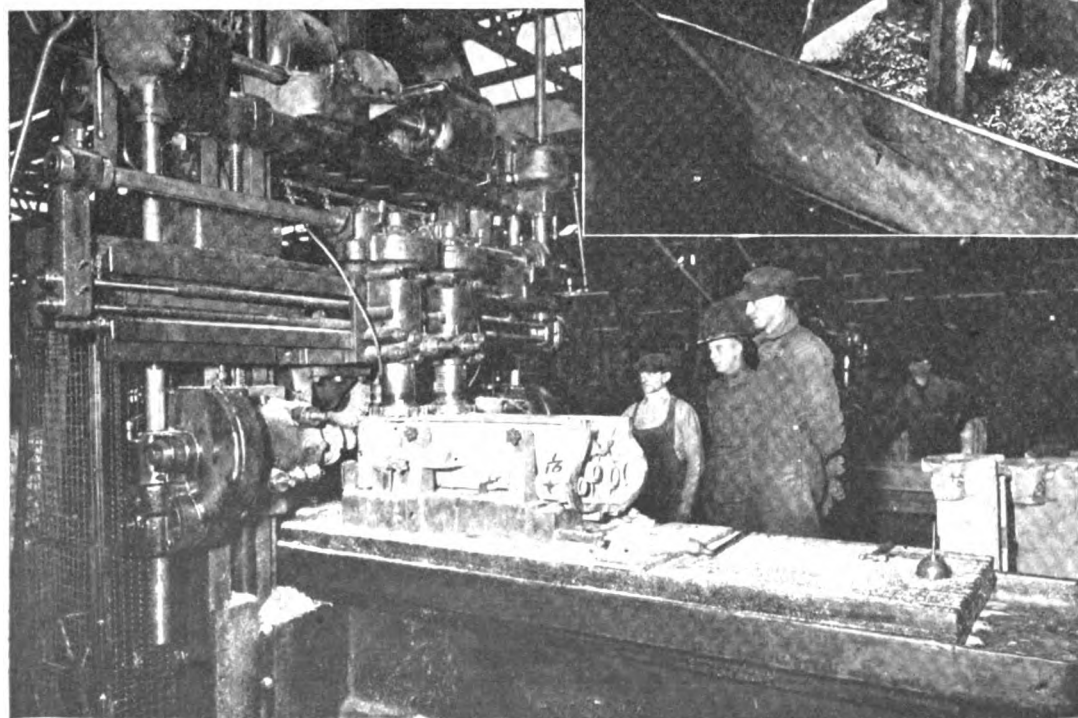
Machining operation on aluminum crankcase. Six surfaces are being machined at one time
